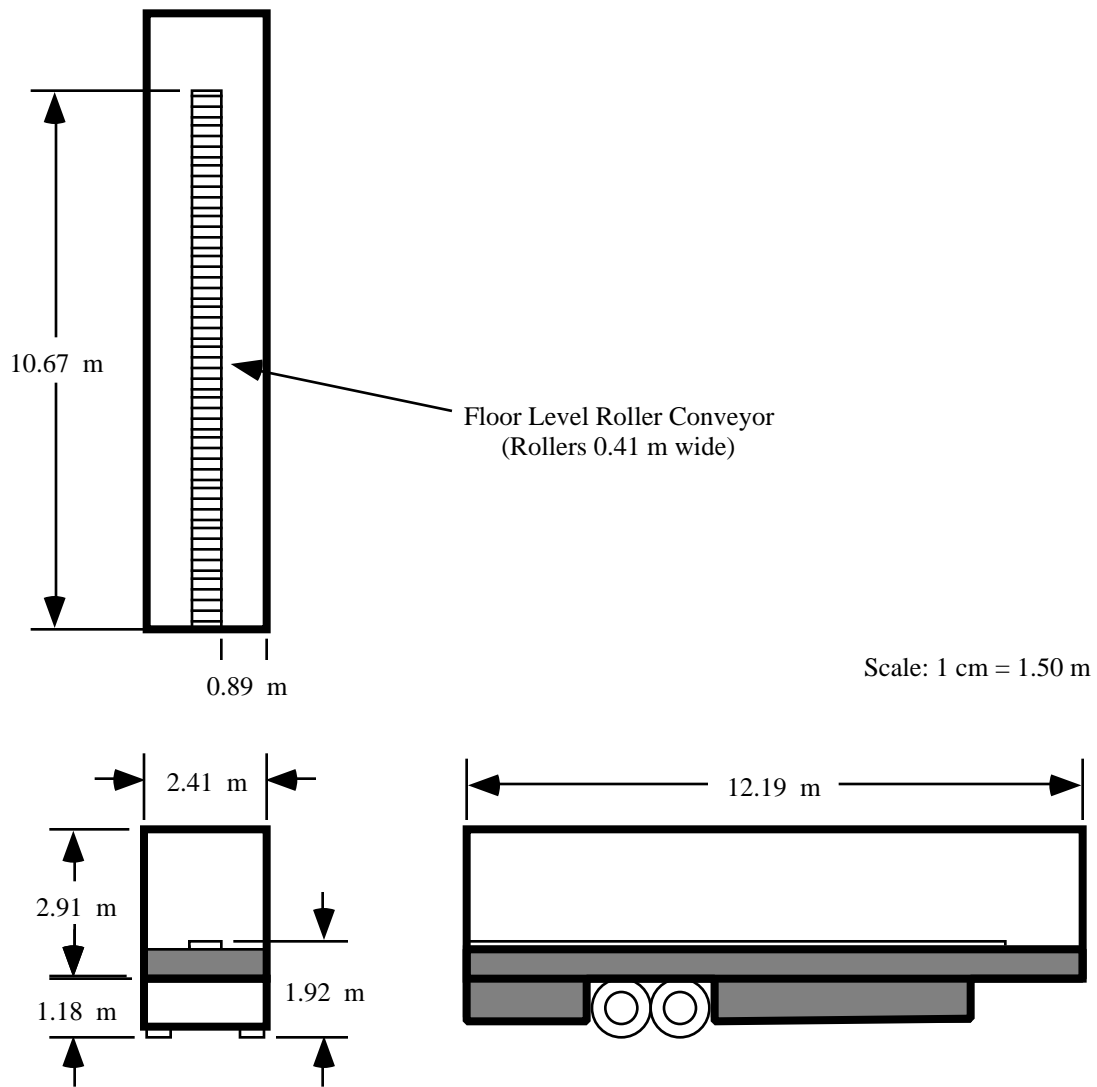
Drop-frame trailer with floor roller conveyor - drawing.
